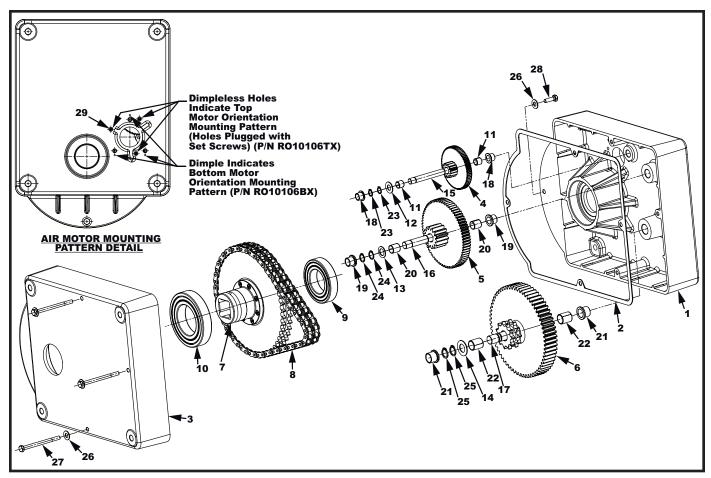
Martin® Gen 4 Railcar Opener Gearcase Assembly, P/N RO10106BP (Sheet 1 of 2)
